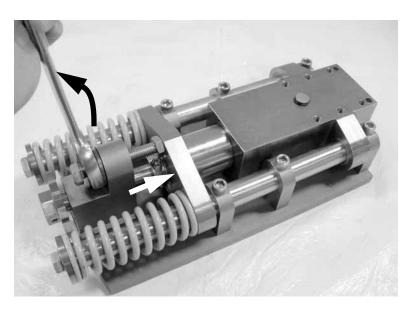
Turn the spring tension nut to move the end plate all the way forward.
